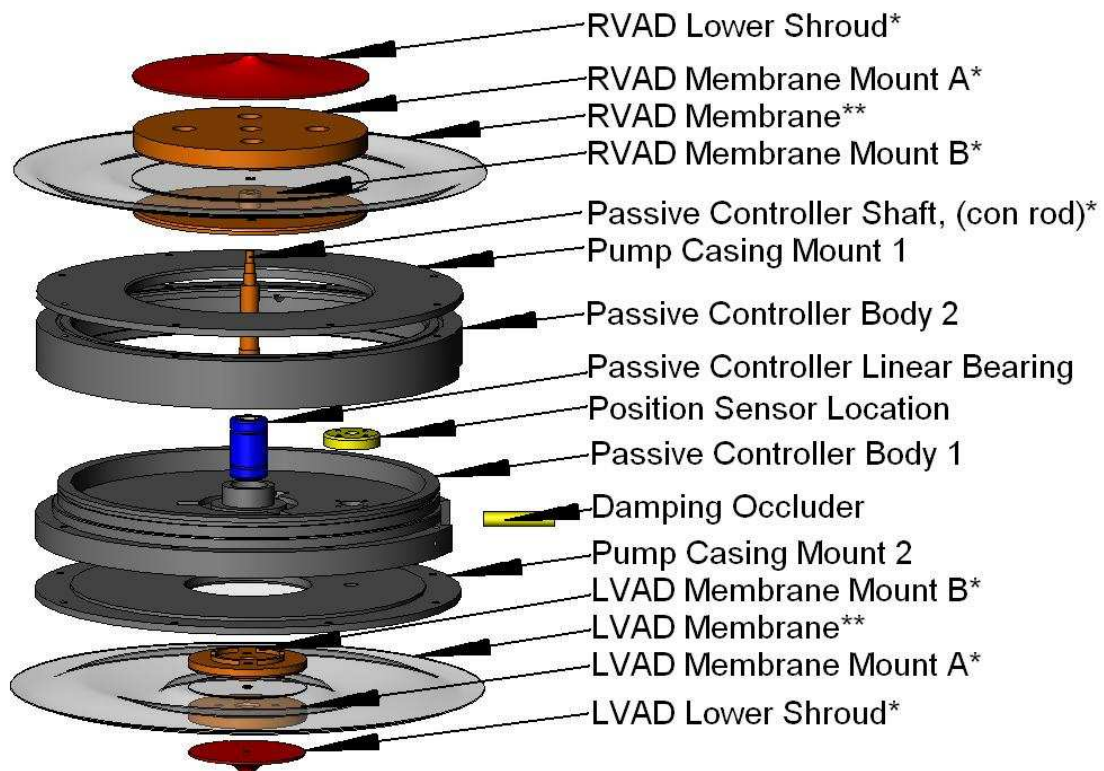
Exploded view of Passive controller and floating assembly, a sub assembly of the complete device.
